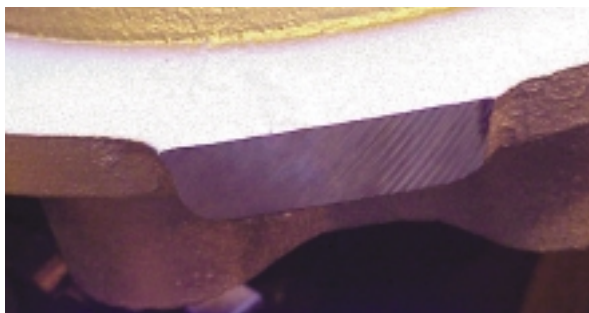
Only one cut is required to remove all gating and risering from the bearing housing when cast with the reverse taper direct pouring system
